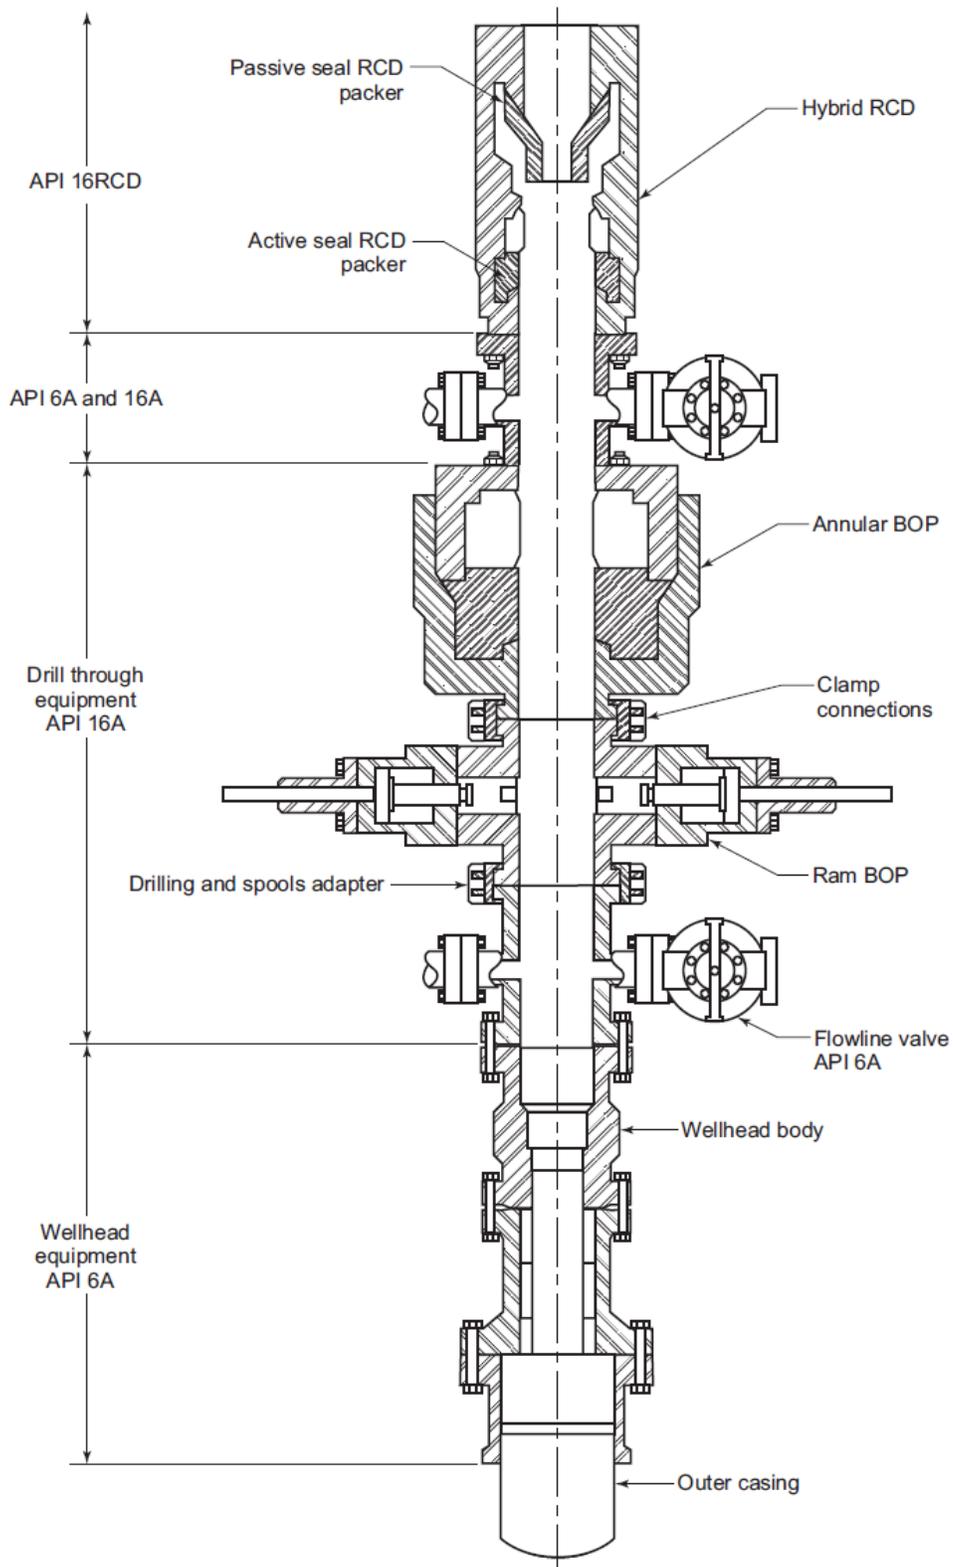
Typical Surface Stack illustrating a Hybrid Rotating Control Device System
